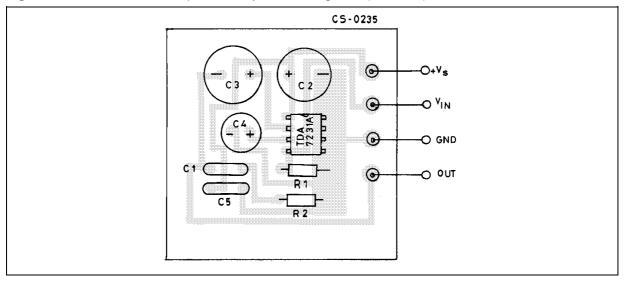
P.C. Board and Components Layout of the figure 1 (1:1 scale)
